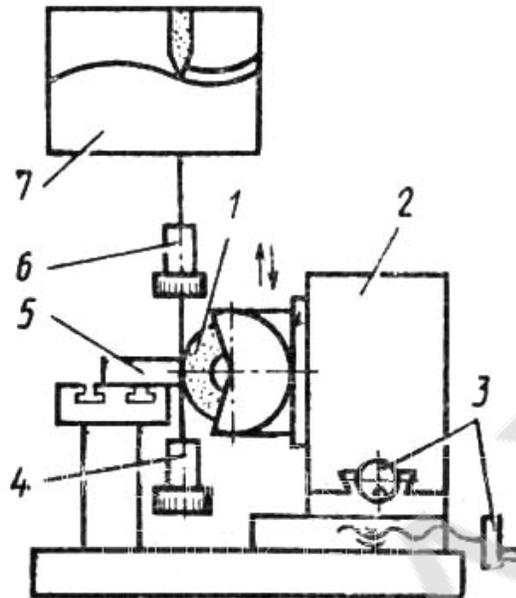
Scheme of forming the profile guide on an optical profile grinding machine
